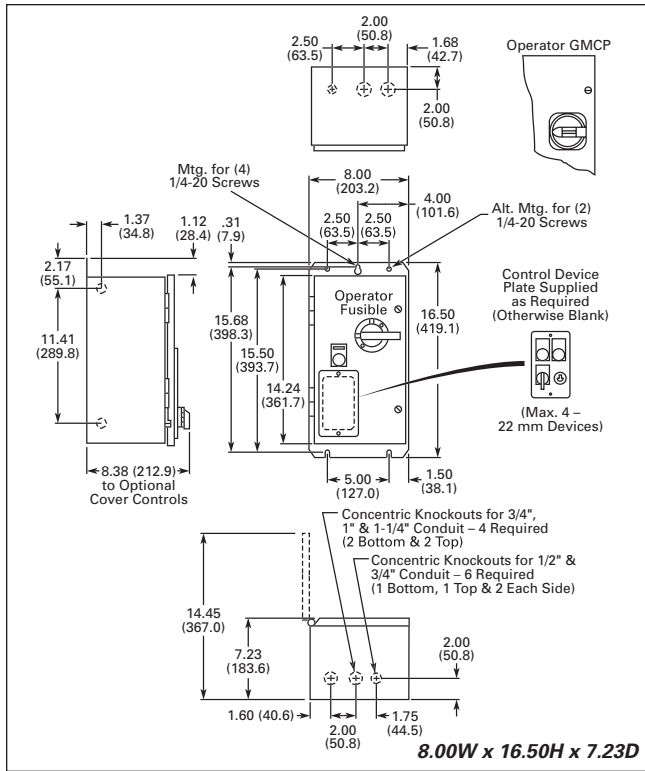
Box J ① — Approximate Dimensions in Inches (mm)
